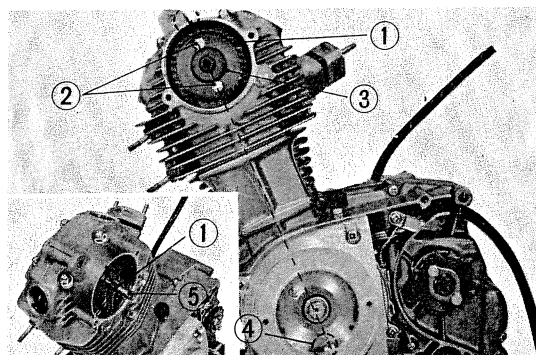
① Cam chain ② 6mm bolts ③ Cam sprocket
